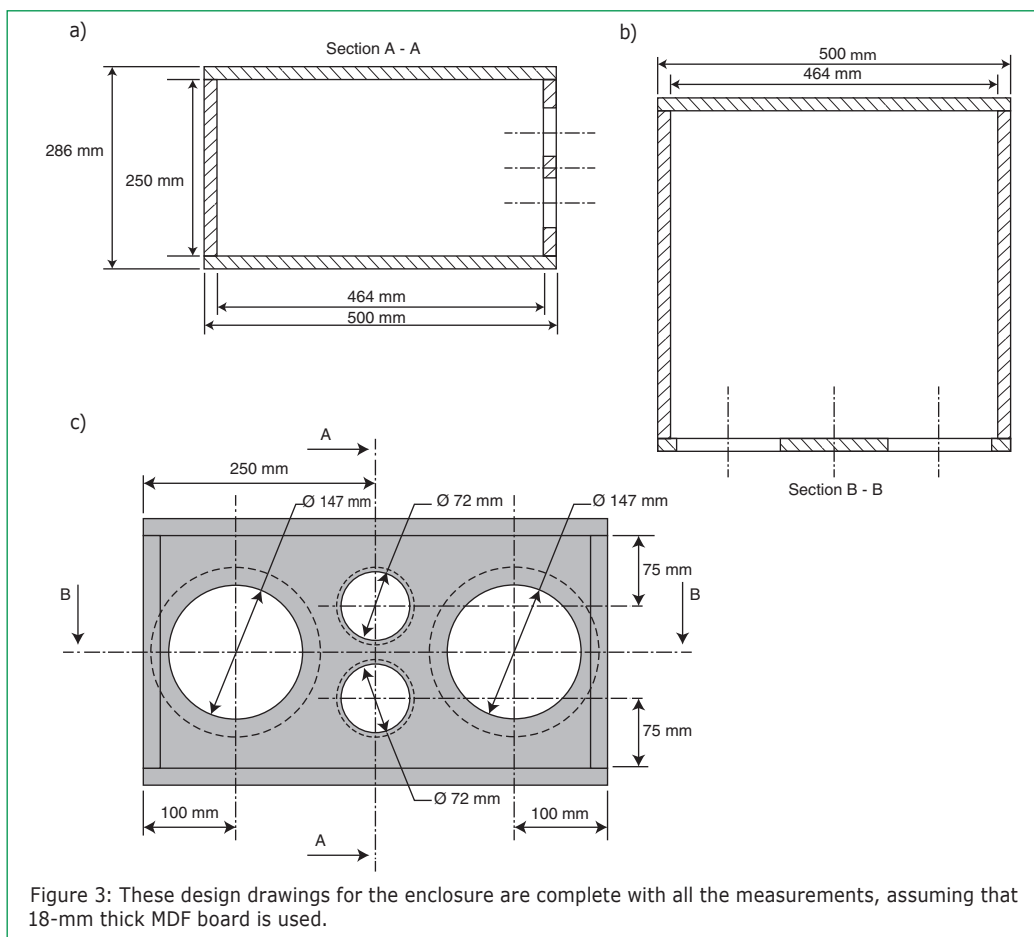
These design drawings for the enclosure are complete with all the measurements, assuming that 18-mm thick MDF board is used.
